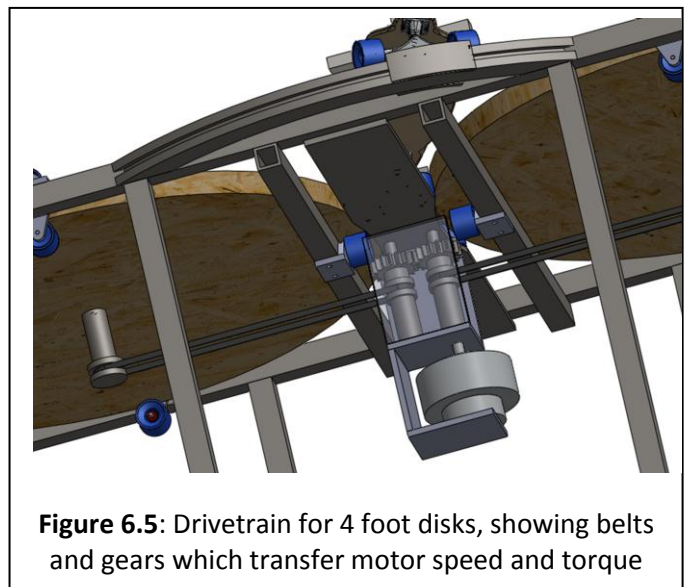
Drivetrain for 4 foot disks, showing belts and gears which transfer motor speed and torque
